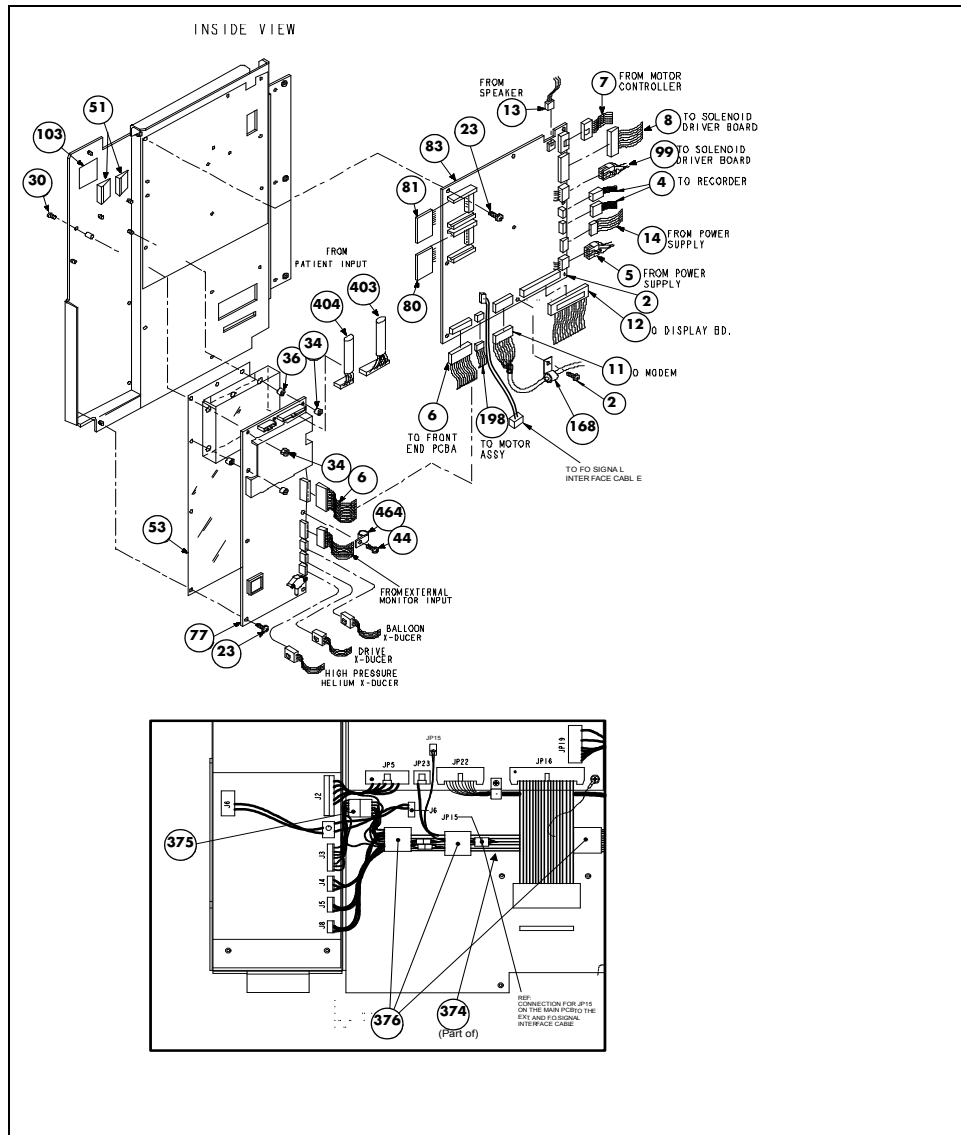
Isometric Drawing, Chassis, Left Door (Inside View)
